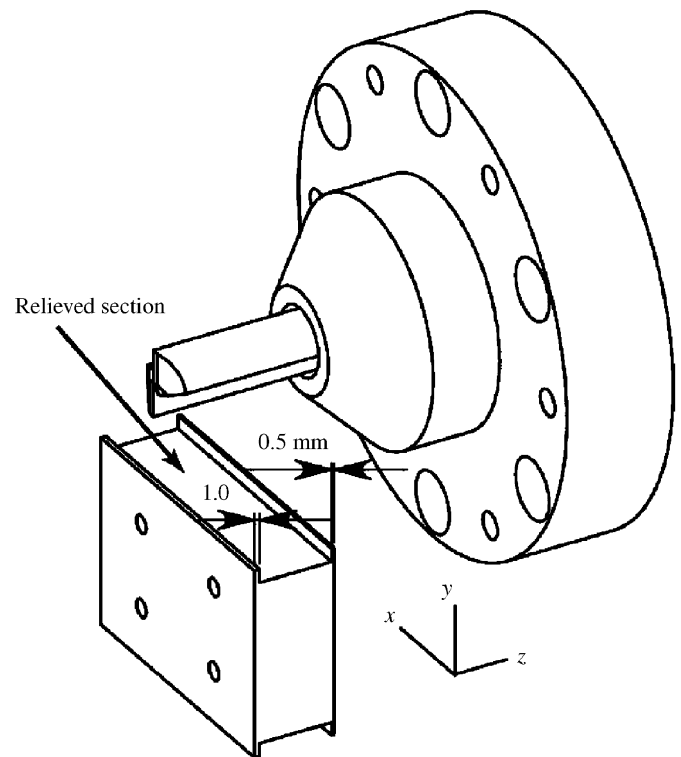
Dynamometer-mounted workpiece (dynamometer not shown). Peripheral up milling was completed by machining the top of the front raised edge. The workpiece was repositioned to complete four tests with a single sample.
